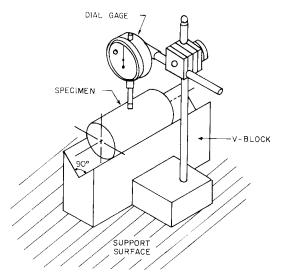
Assembly for Determining the Straightness of Elements on the Cylindrical Surface
